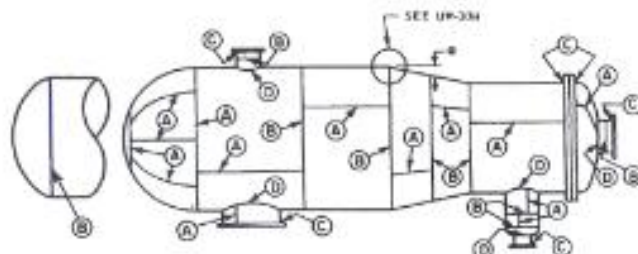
ILLUSTRATION OF WELDED JOINT LOCATIONS TYPICAL OF CATEGORIES A, B, C, AND D
